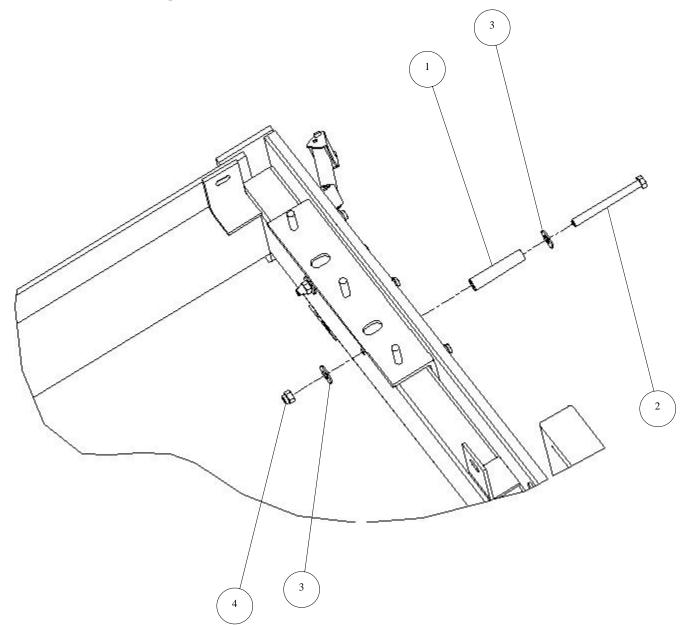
Cab Frame Rail Sleeve Bushing Installation.
